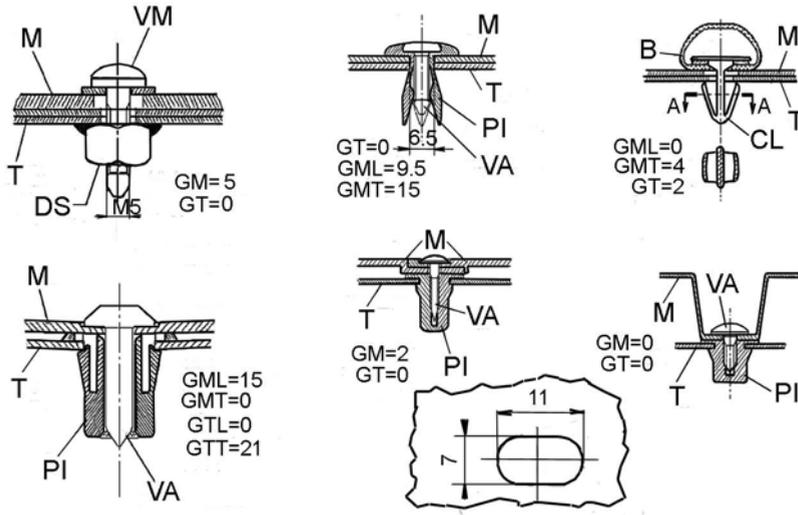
Examples of plastic inserts for grille fitting and play needed on grilles and metal sheets. M) grille; T) upper cowl; PI) plastic insert; CL) clip; VA) self-threading screw; VM) metric screw; DS) weld nut; B) bulb; GM) grille play; GML) longitudinal grille play; GMT) transverse grille play; GT, GTL, GTT) slot plays.
